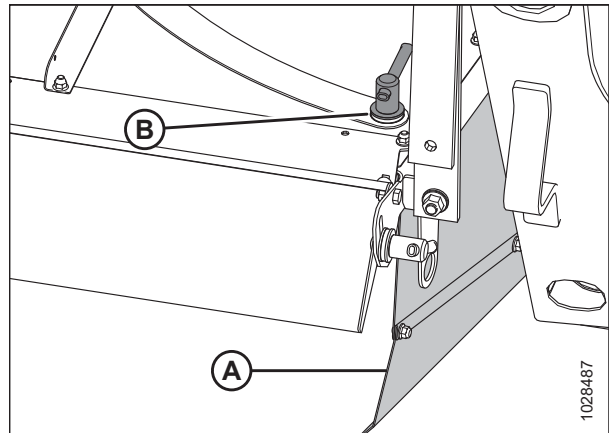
Forming Shield Side Deflector and Adjuster Handle
